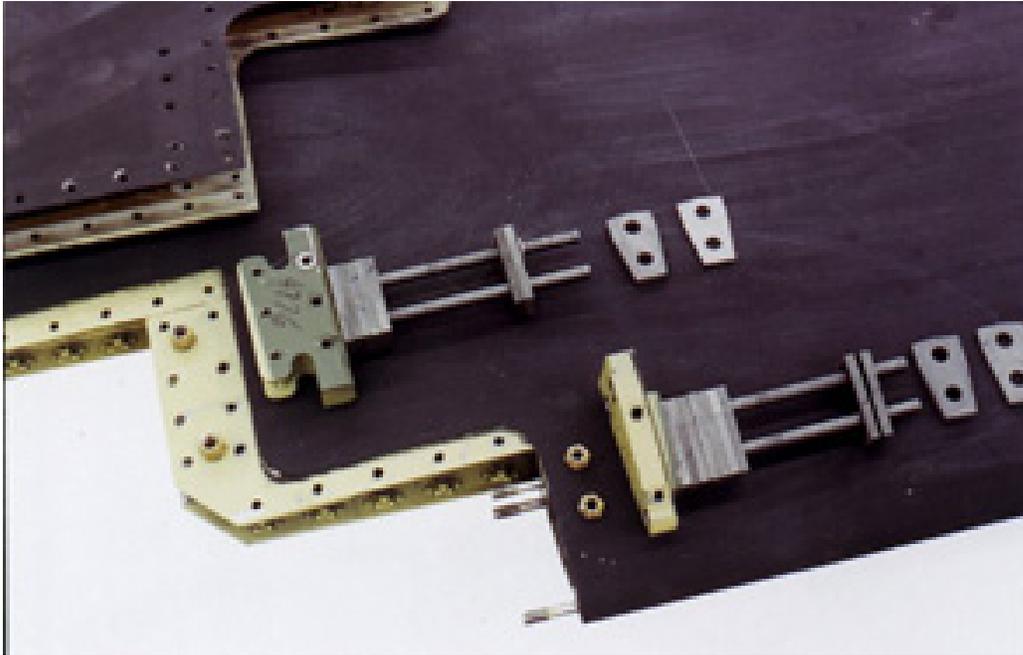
Apache AH-64 Main Rotor Blade Weight Packages
